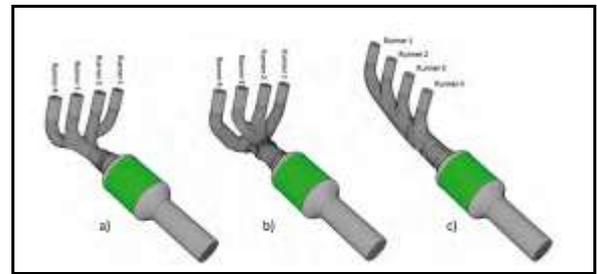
a) cast manifold, b) 4-2-1 manifold and c) L-shaped manifold.
